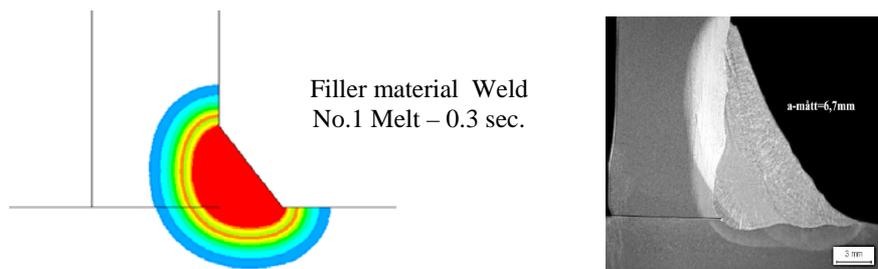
Thermal analysis: Numerically and experimentally weld penetration profile;
